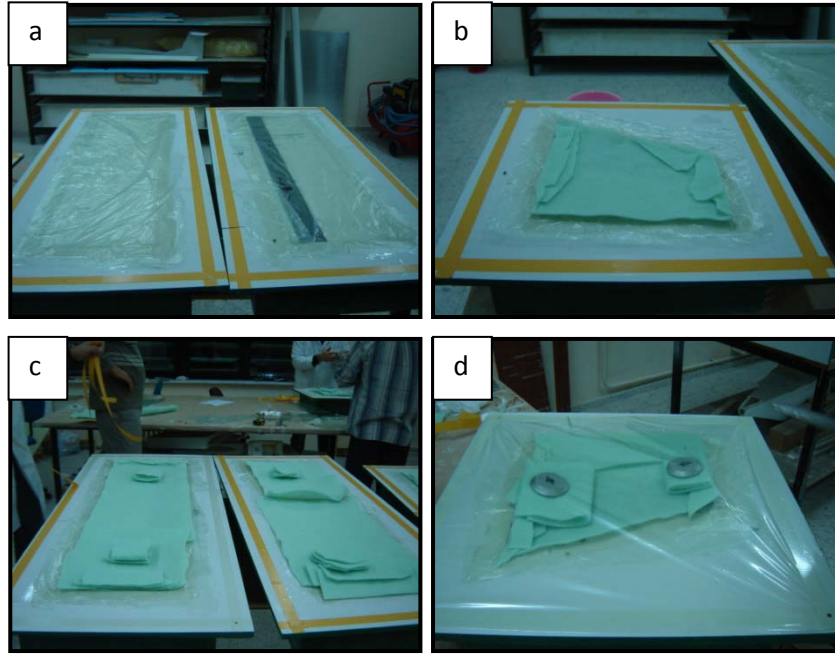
Molds covered with punctured nylon foil (a) and composite blanket(b), additional composite blanket pieces placed to the vacuum port positions (c), vacuum bag placed (d)
